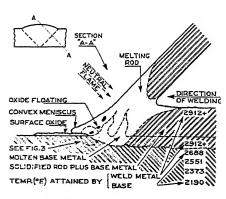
Sketch indicating metallurgical factors in neutral flame welding.
